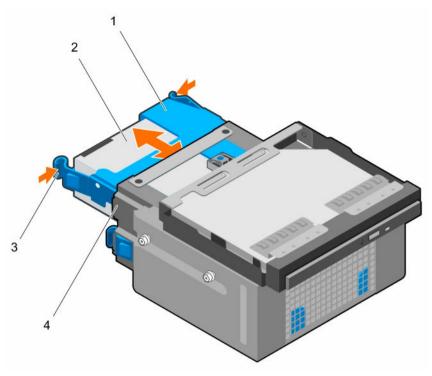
Removing and installing hard drive carrier from the hard drive cage
